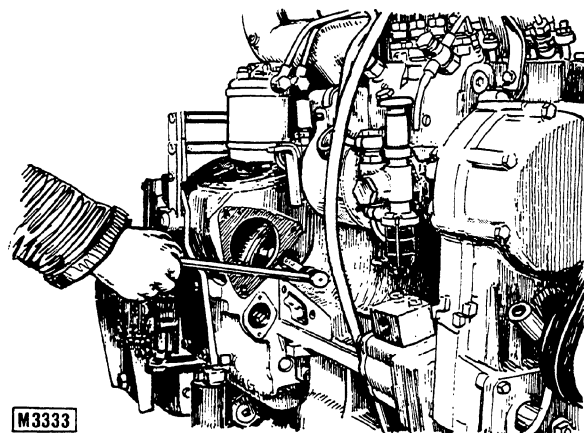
Disassembling (assembling) screws securing flexible coupling to flywheel.
